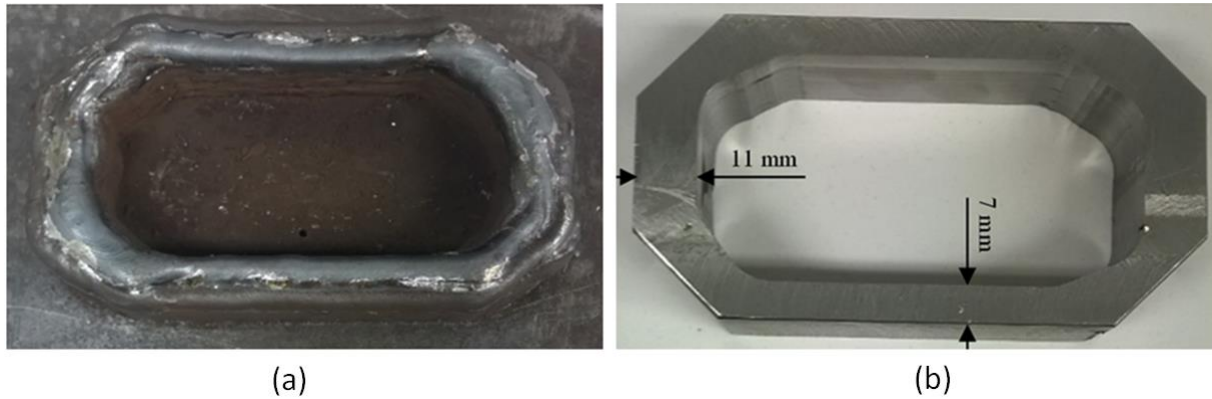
(a) Deposited near-net shape after 15 layers. (b) Finished part without voids after surface milling.
